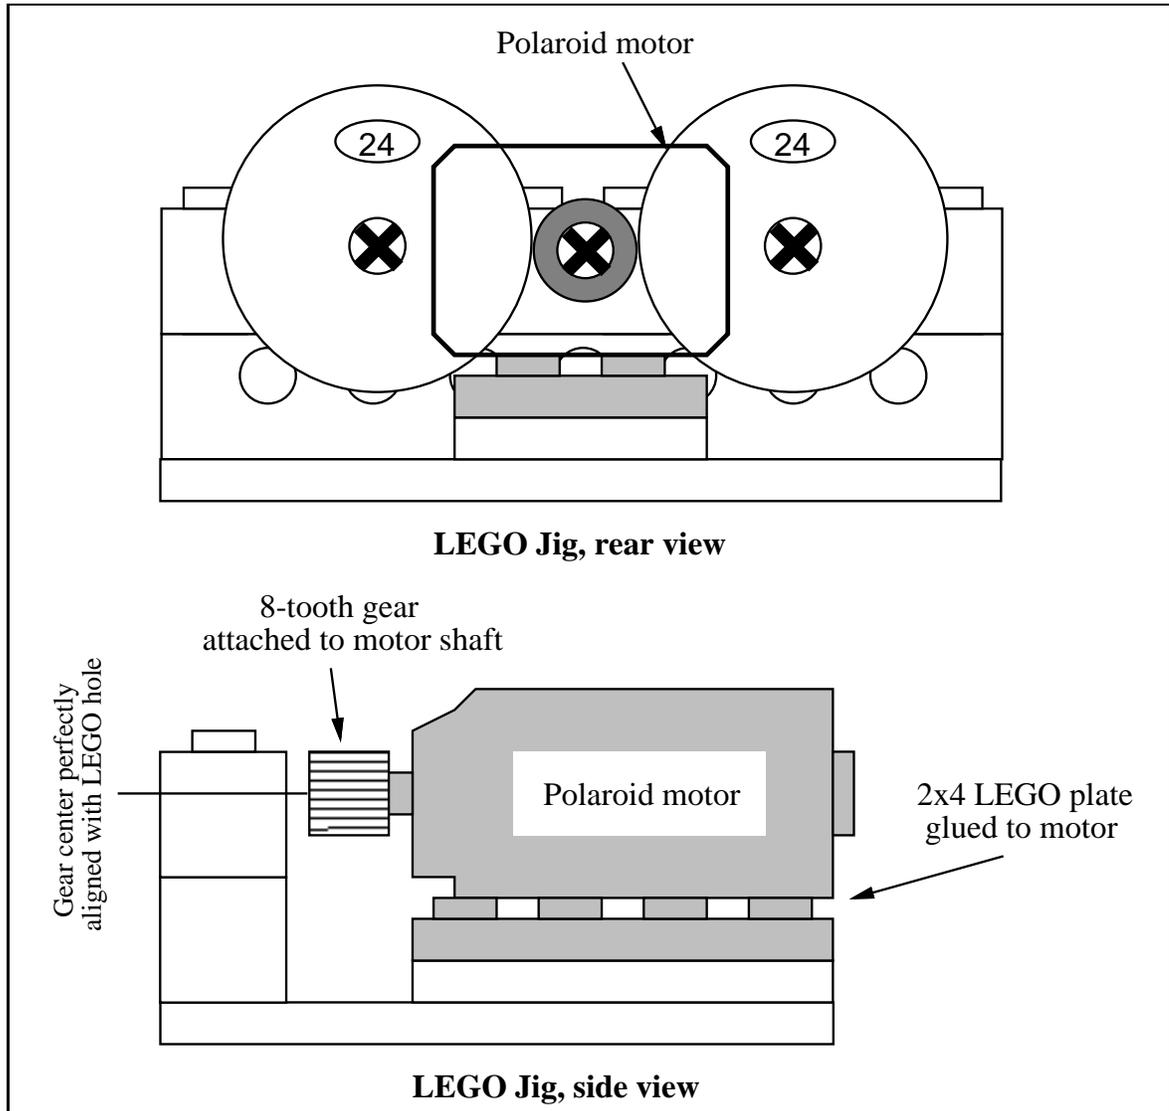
LEGO Jig for Mounting Polaroid Motor
